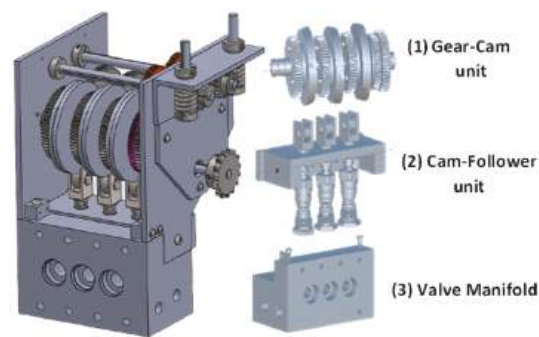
CAD drawing showing the basic units of the mechanically actuated digital pump.
